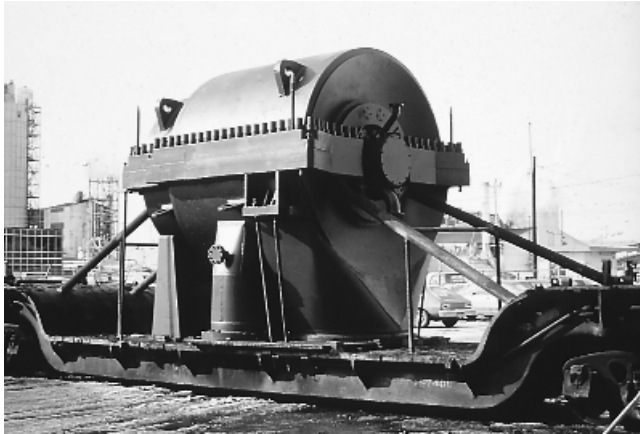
Completed fabricated compressor. (*Dresser-Rand Company, Olean, N.Y.*)
